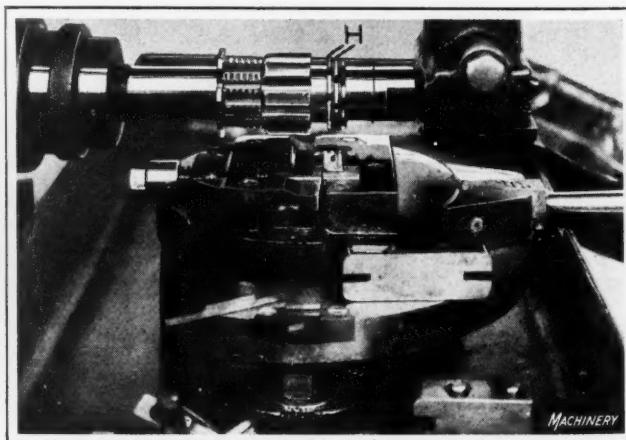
Fixture in Position for milling Slots A and B, on Part shown in Fig. 1
